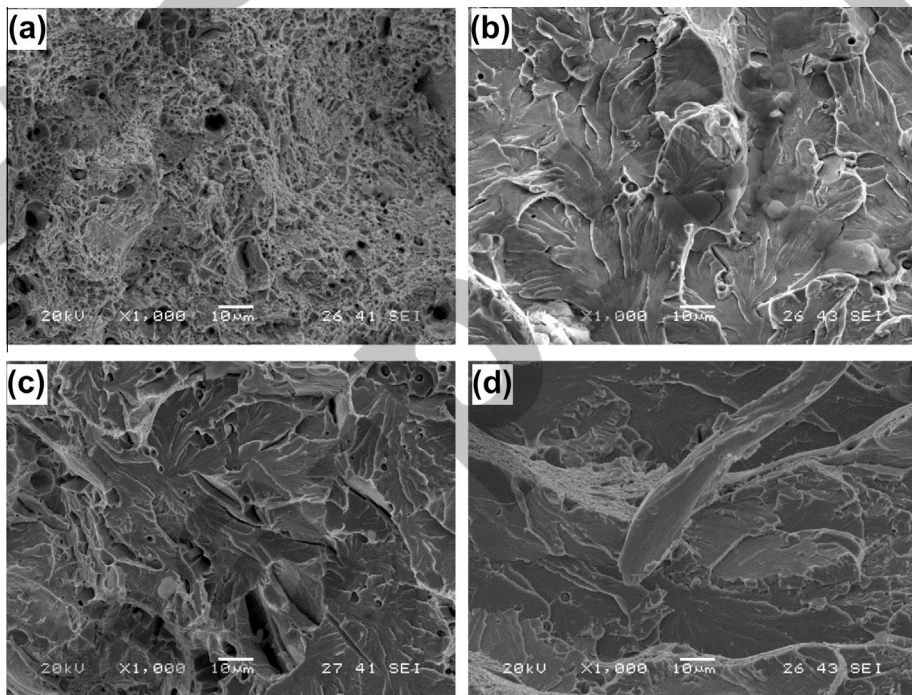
Fracture surfaces of the MC-MA steel forged and then cooled in different medium (a) as-received, (b) sand, (c) air and (d) oil.
